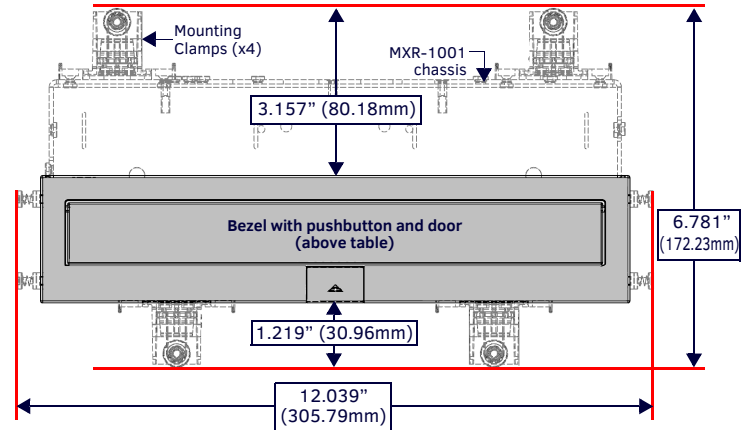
MXR-1001: TOP VIEW, INDICATING AREA REQUIRED BELOW THE MOUNTING SURFACE
